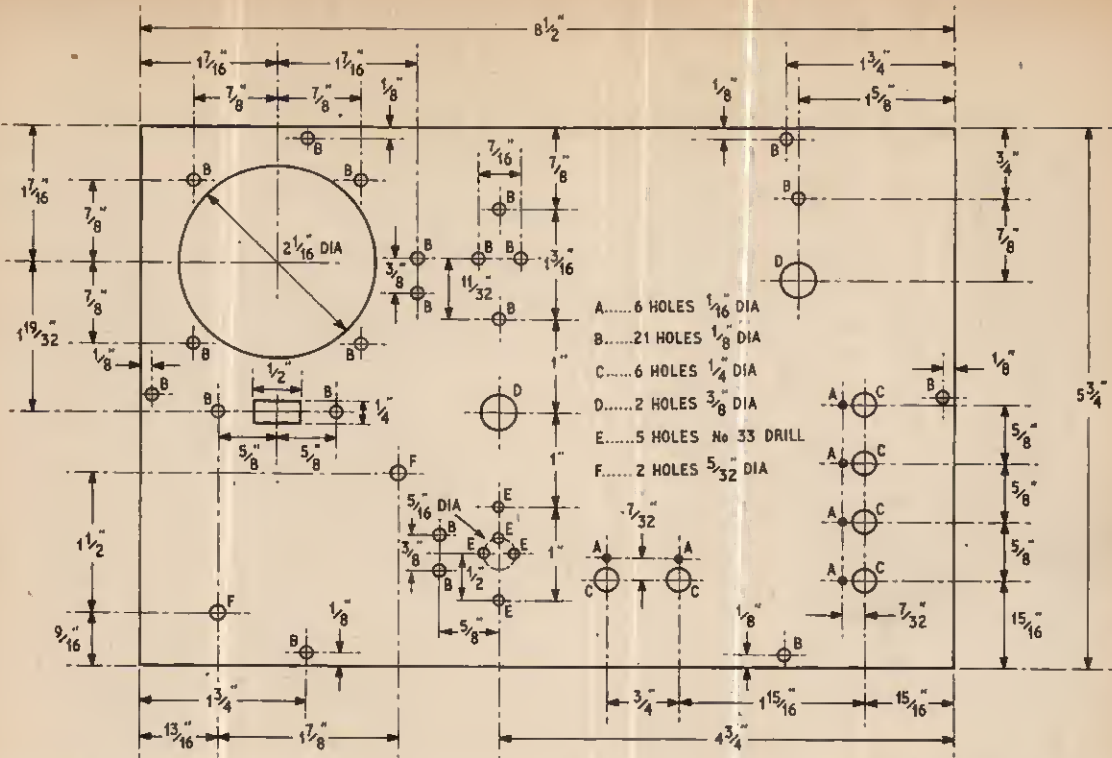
Drilling details of the front panel: Holes C are for the terminals which also hold the component assembly board in position
